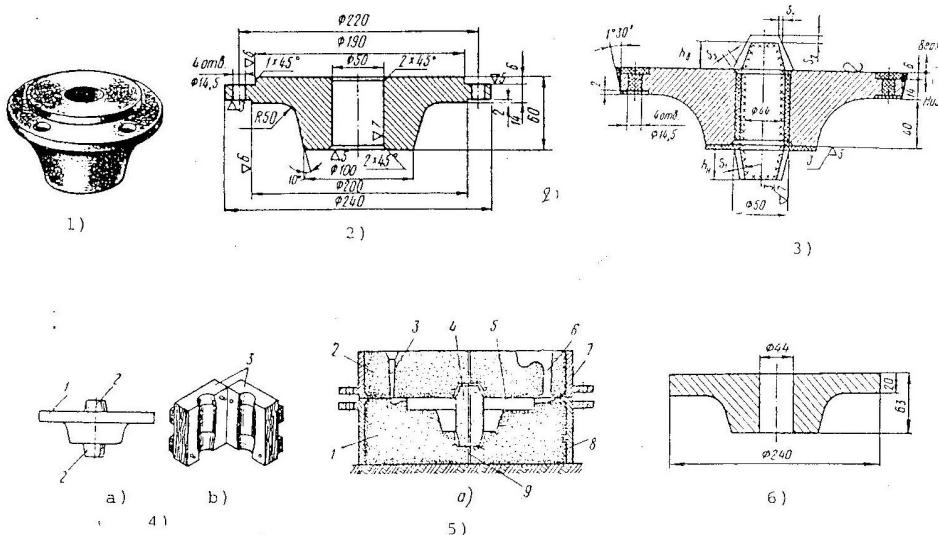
A simple casting that illustrates the principle of molding a pattern and withdrawing it from a sand mold
